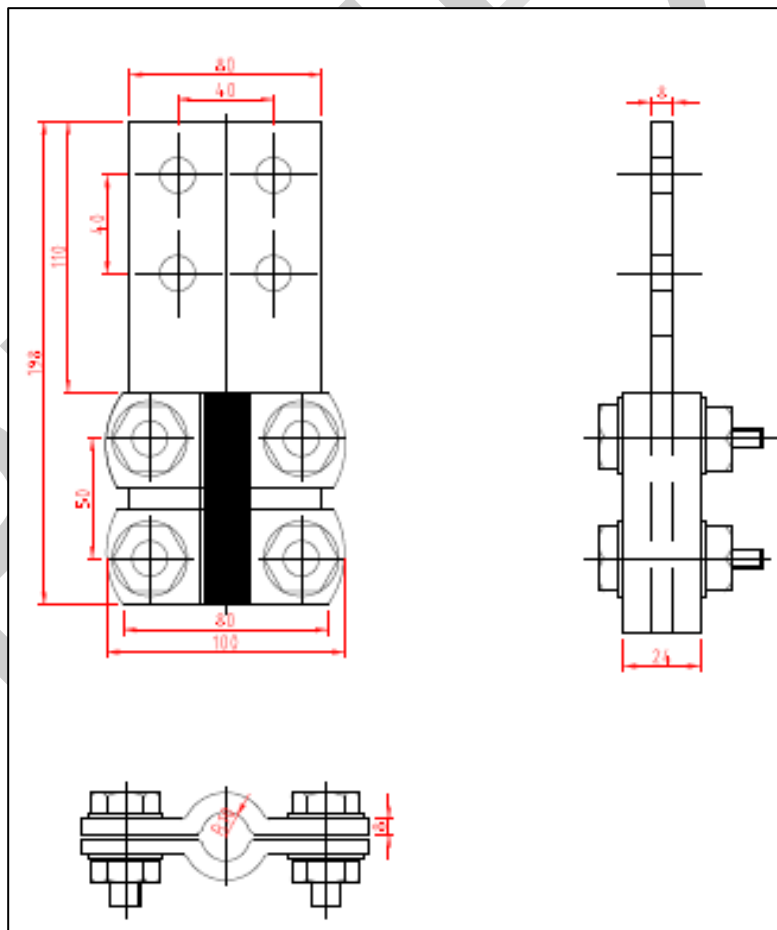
Aluminium Bronze Four bolt Terminal Connector for OHE Jumpers
